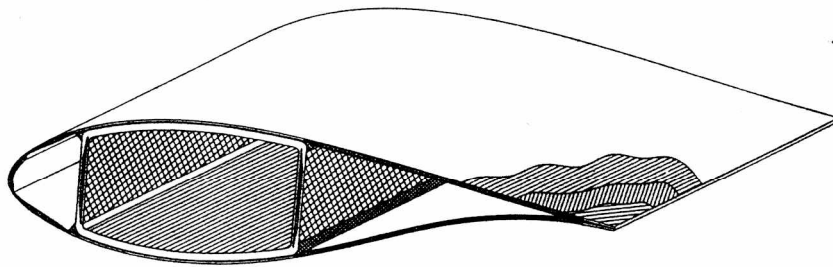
Blade cross section. Construction of a fiberglass blade found on many medium-sized wind machines. The central section is the spar, which provides the blade's principal structural support. (Vestas DWT)
